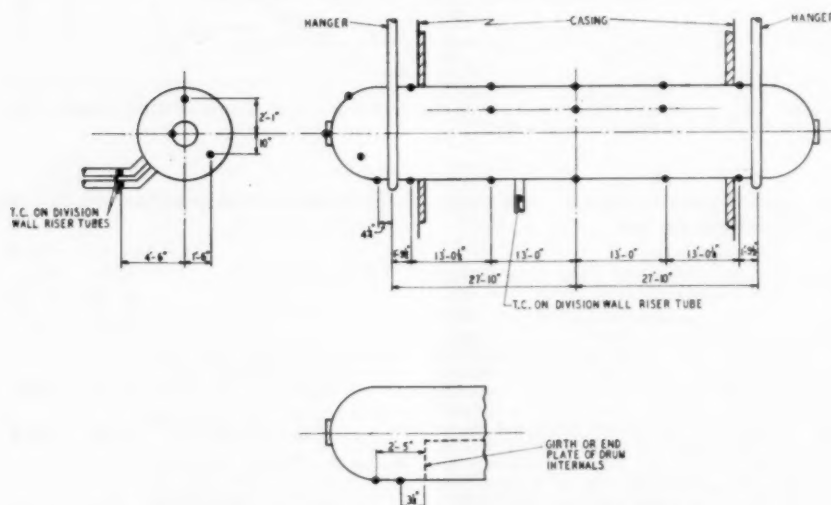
Boiler drum thermocouple locations, Martins Creek No. 1 unit
